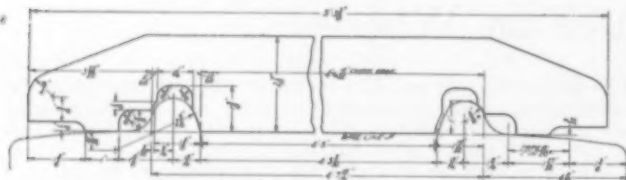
Proposed Mounting Gage for Use on Reinforced Flange Cast Iron Wheels
